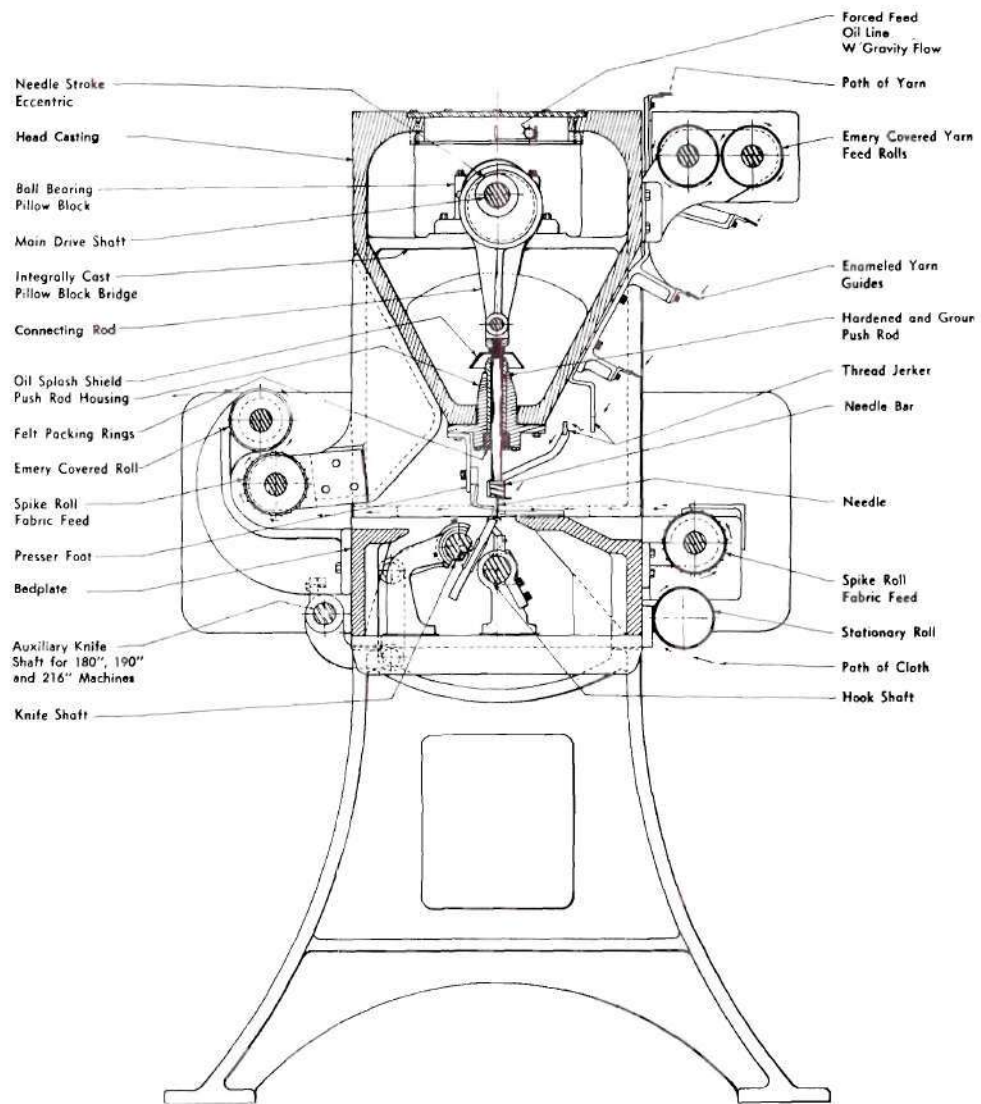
Cross Section of a Cut-pile Tufting Machine (1).
